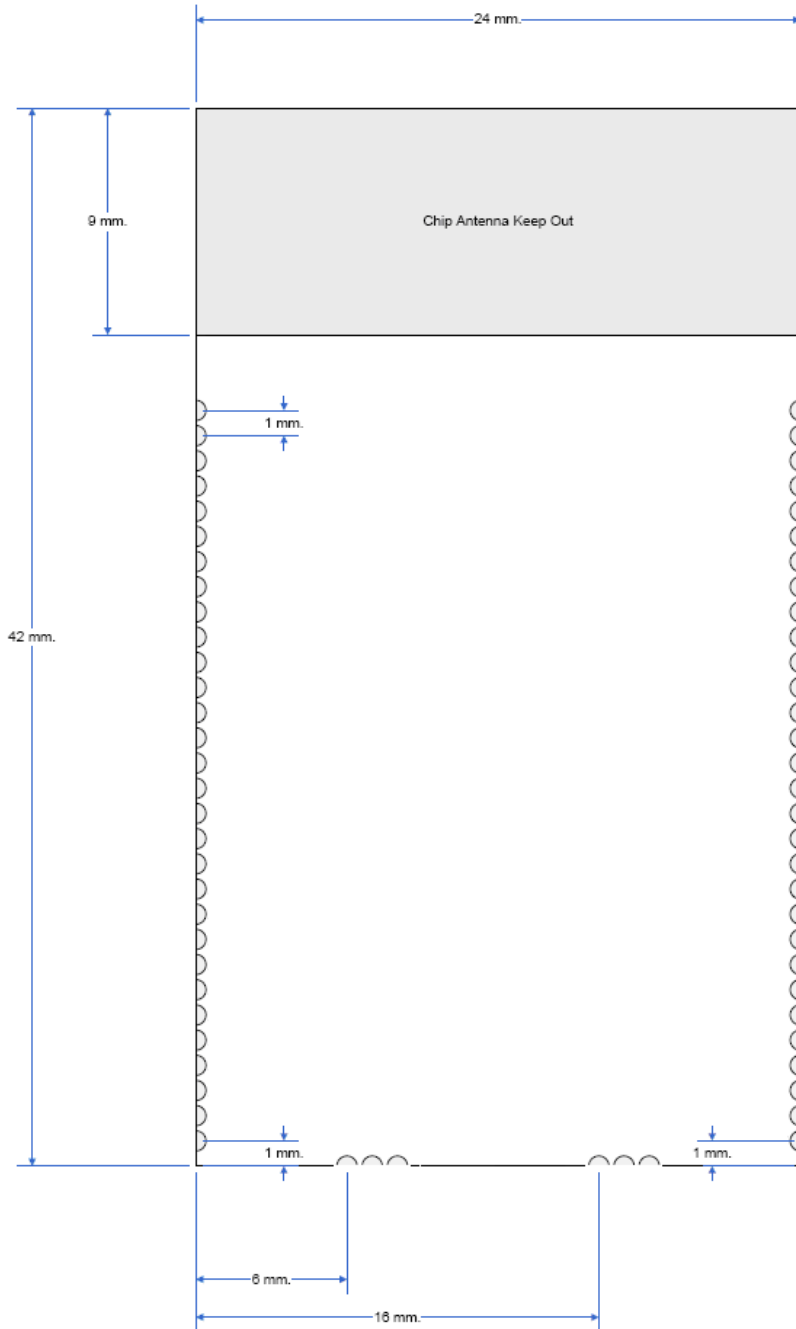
Mechanical Drawing – M6001 Mote with Chip Antenna Keepout
